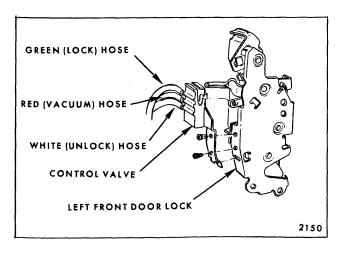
Vacuum Door Lock Control Valve – Pontiac Style
